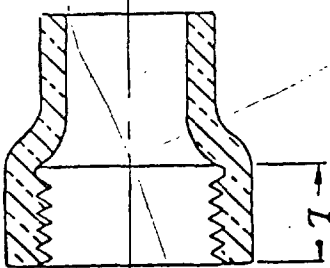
Coupling Nut for Use With Flared Copper Service Tubes, Type K Fig. 4. Fitting Thread for Use With Extra Strong Lead Flanged Pipe
